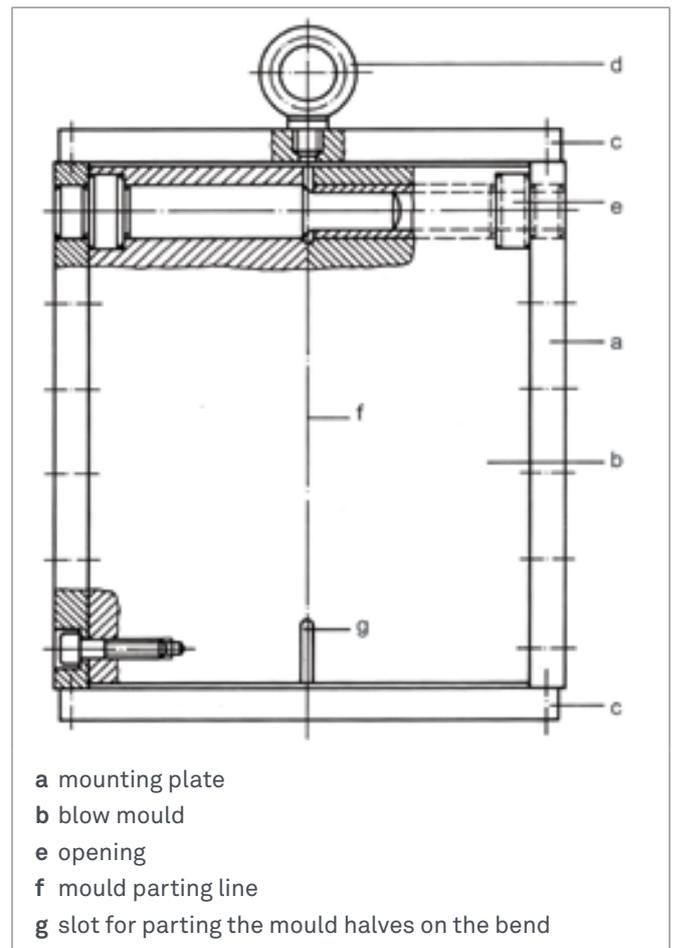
Mould Block with Transverse Bars (C) and Eyebolt (D) for Mounting
